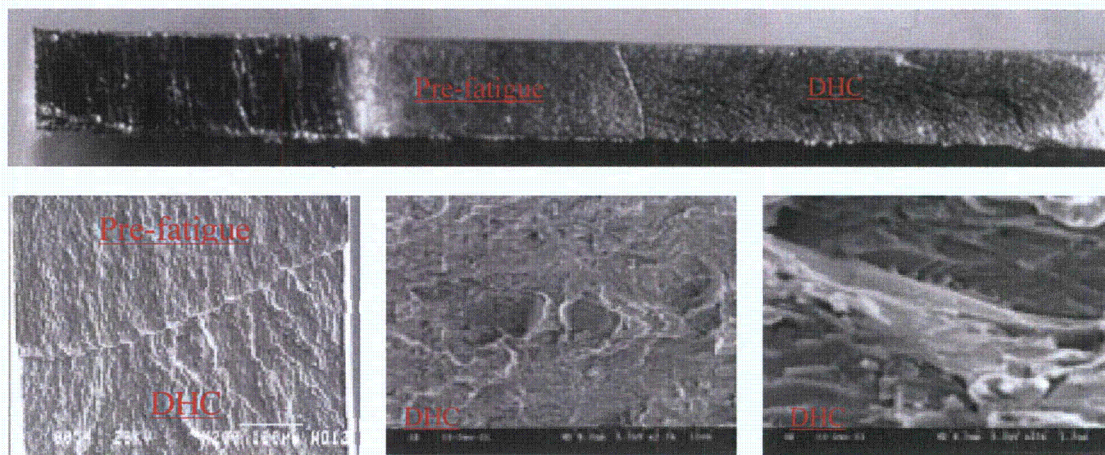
Typical macroview of DHC fracture surface in unirradiated hydrided Zircaloy cladding and SEM photos of the same fracture surface (the SEM photos are the courtesy of K. Pettersson).
